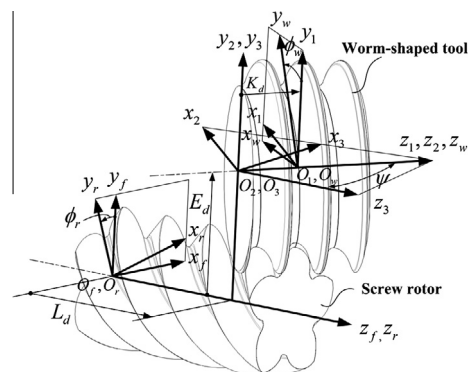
General coordinate systems of the worm-shaped tool machining for screw rotors.
